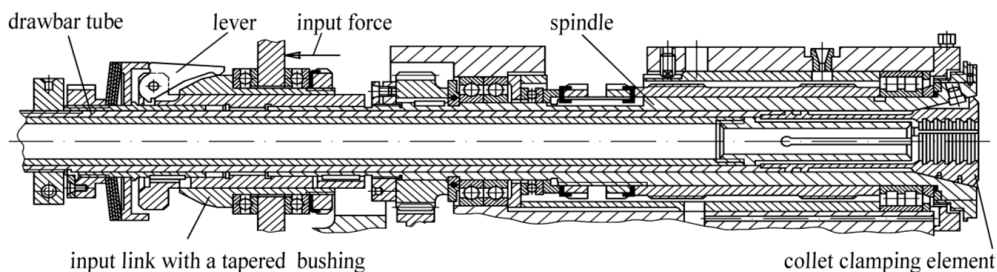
Automatic clamping mechanism of a typical structure with form closure and collet clamping chuck as part of the spindle assembly of the automatic lathe
